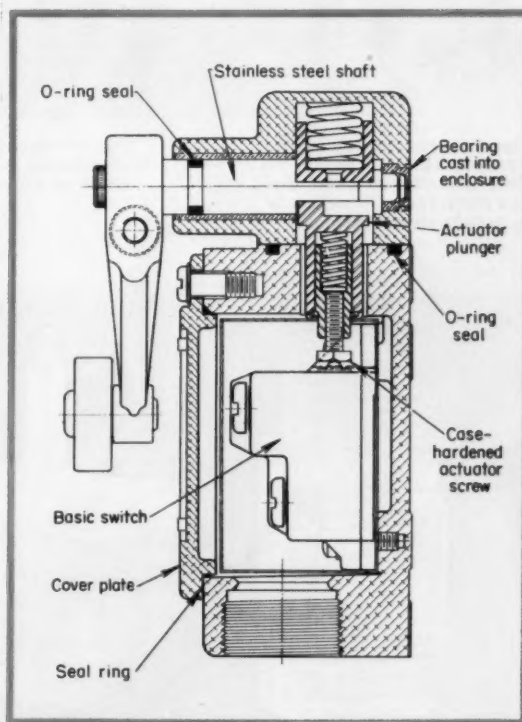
Sealed switch with O-rings on actuating shaft and between actuator head and switch body. A seal is also used under the cover plate.
